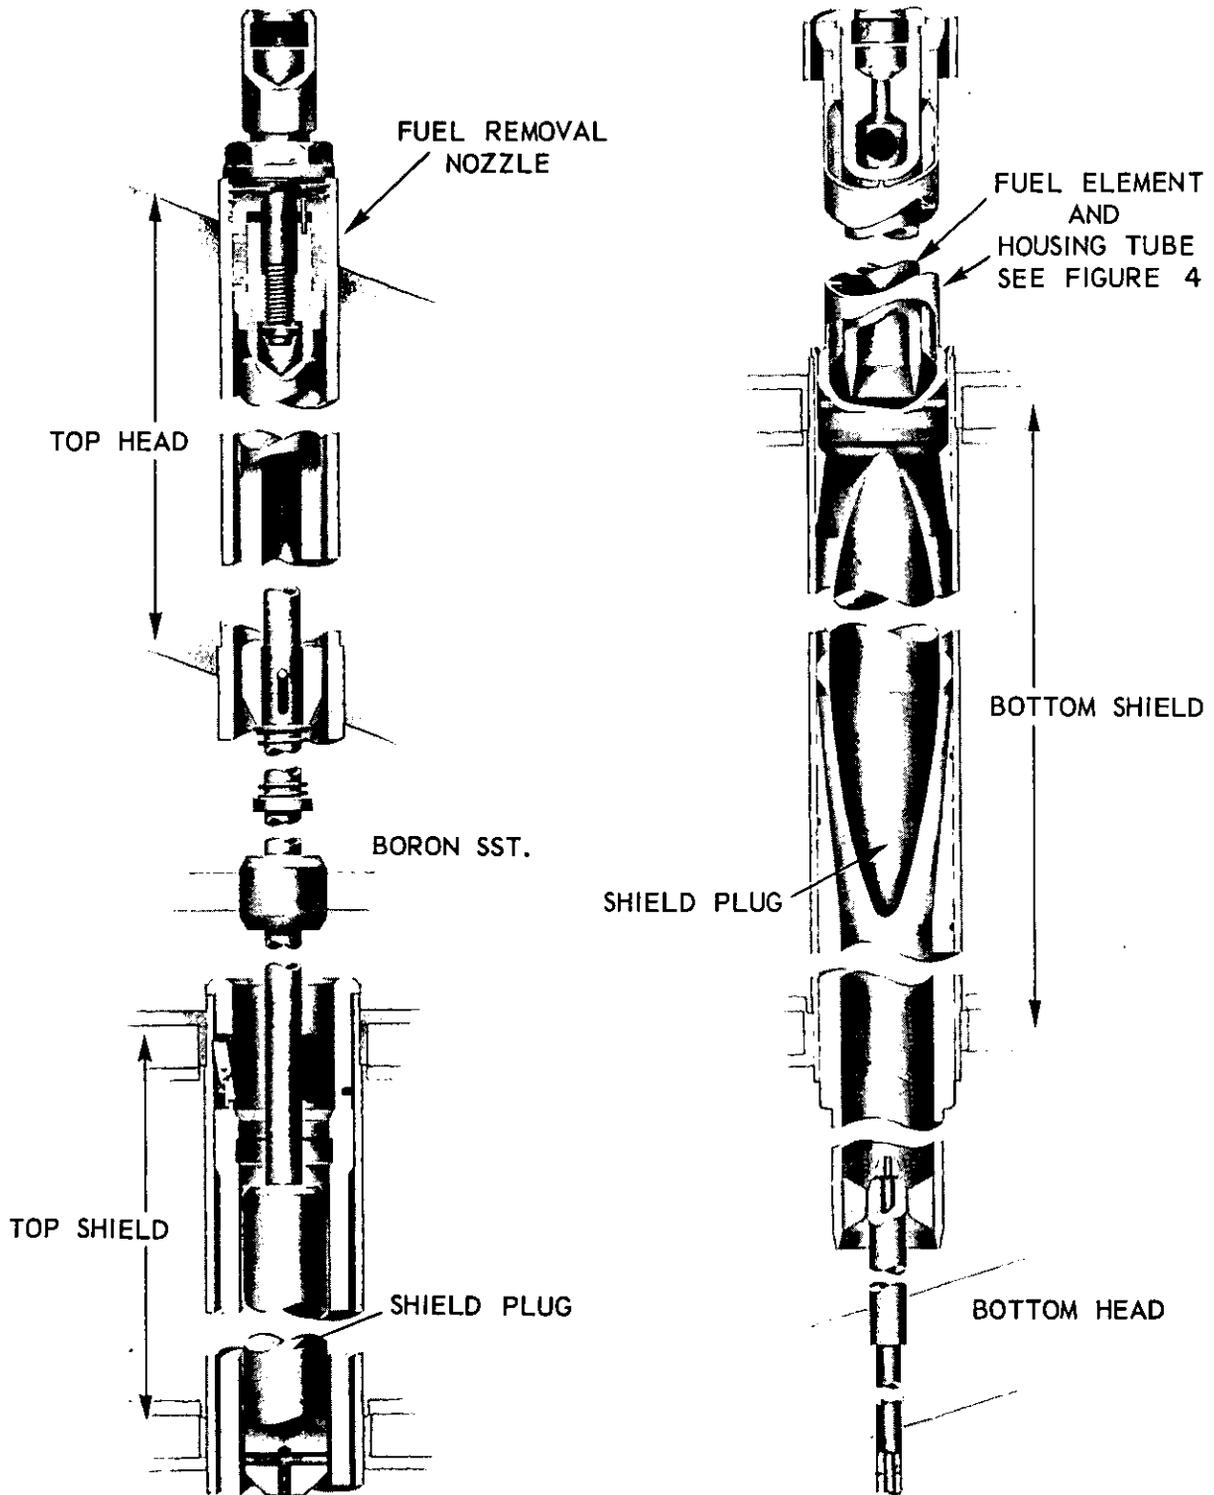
FUEL ELEMENT AND HOUSING TUBE ASSEMBLY
